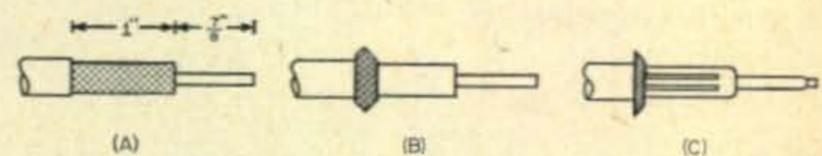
Simple diagram showing how to solder coaxial cable into a Motorola type fitting. Strip covering back about 1 7/8" (A). Then push back the braid into a bead (B). Insert the plug until the bead touches the plug shell and solder the braid to the plug tabs. Solder the center conductor and cut-off any excess wire (C).
